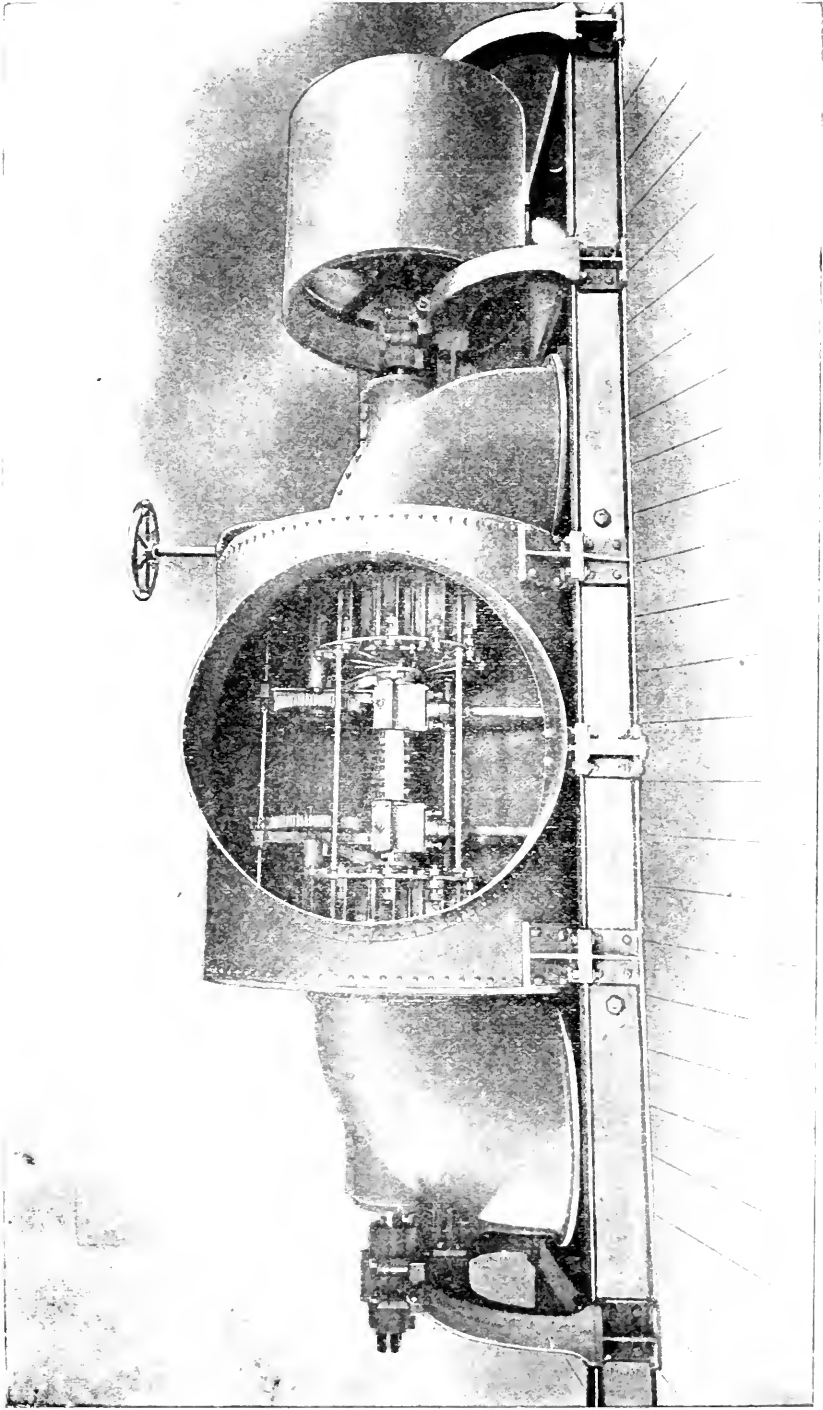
Double-Discharge, Horizontal Shaft "Samson" Turbine with Casing.
